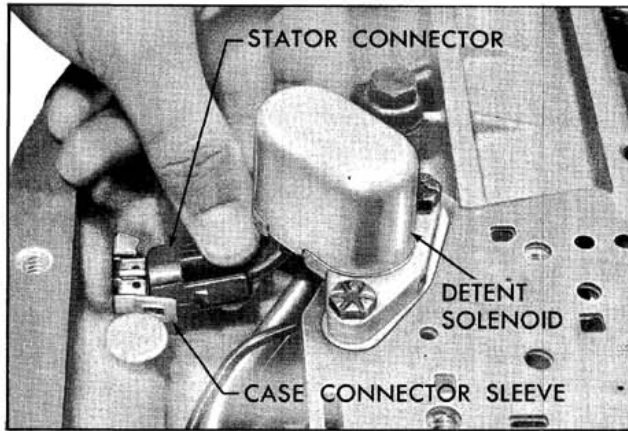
Disconnecting Electrical Connector From Case Connector
